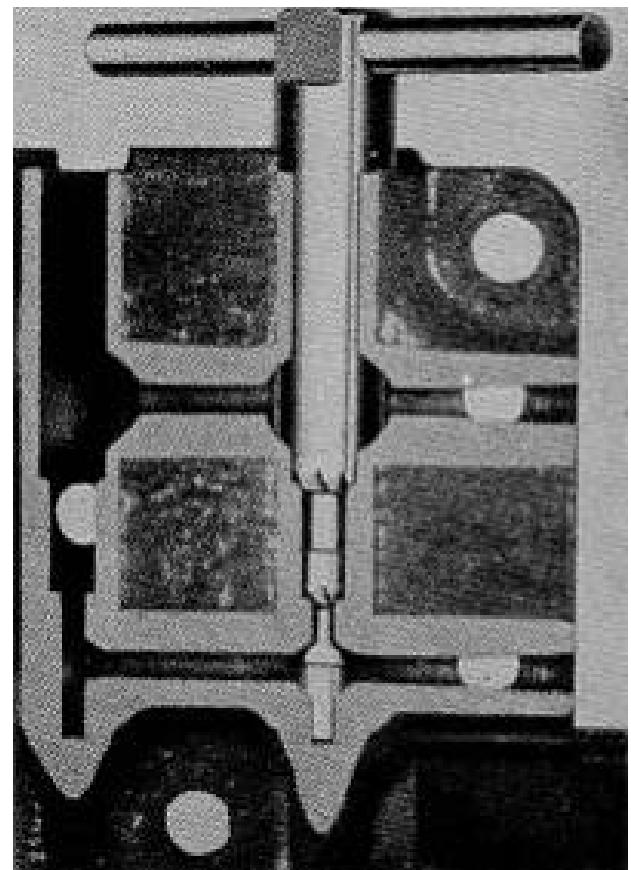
Hydraulic pump inlet and outlet valve seats in pump valve chamber can be reseated as shown.
